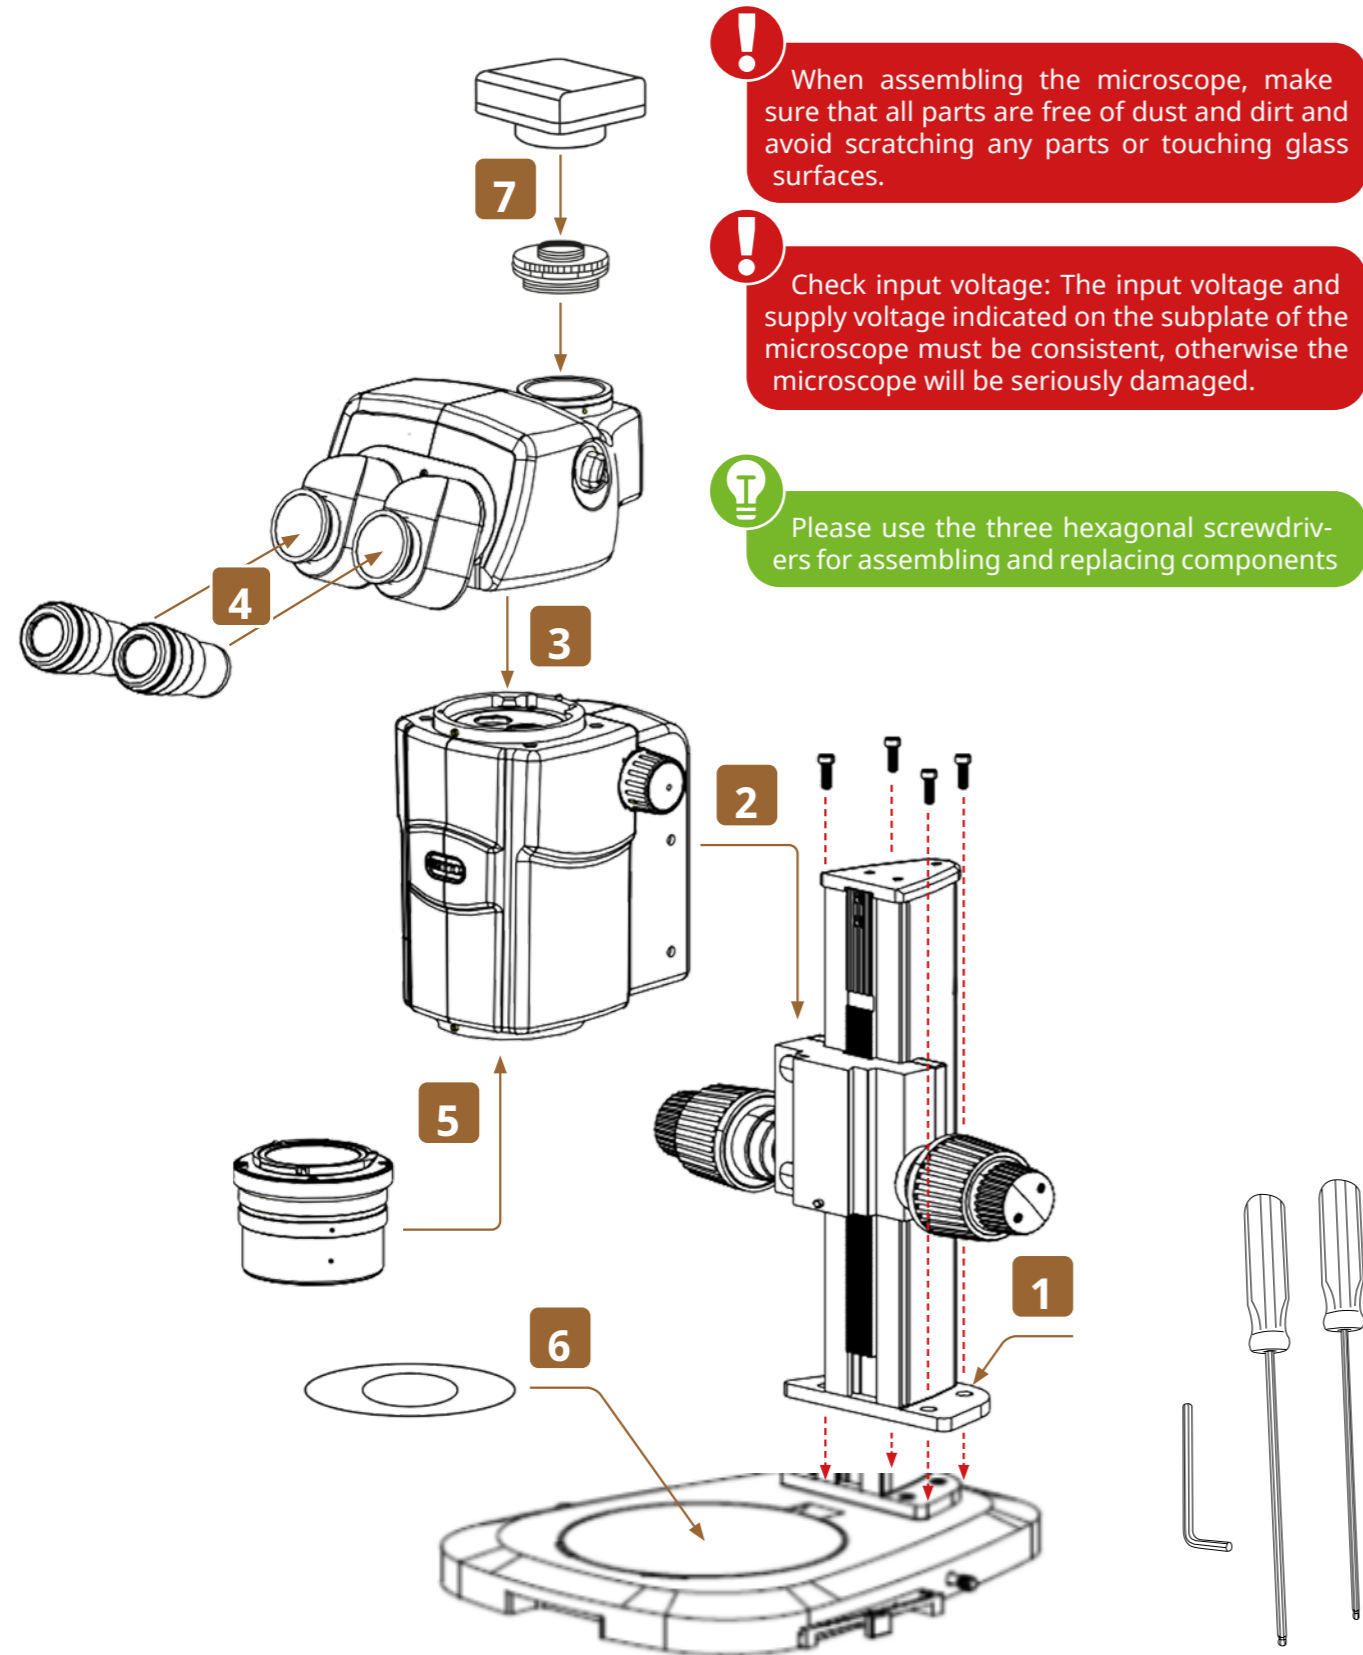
Assembly of zoom stereo microscope NSZ818.
